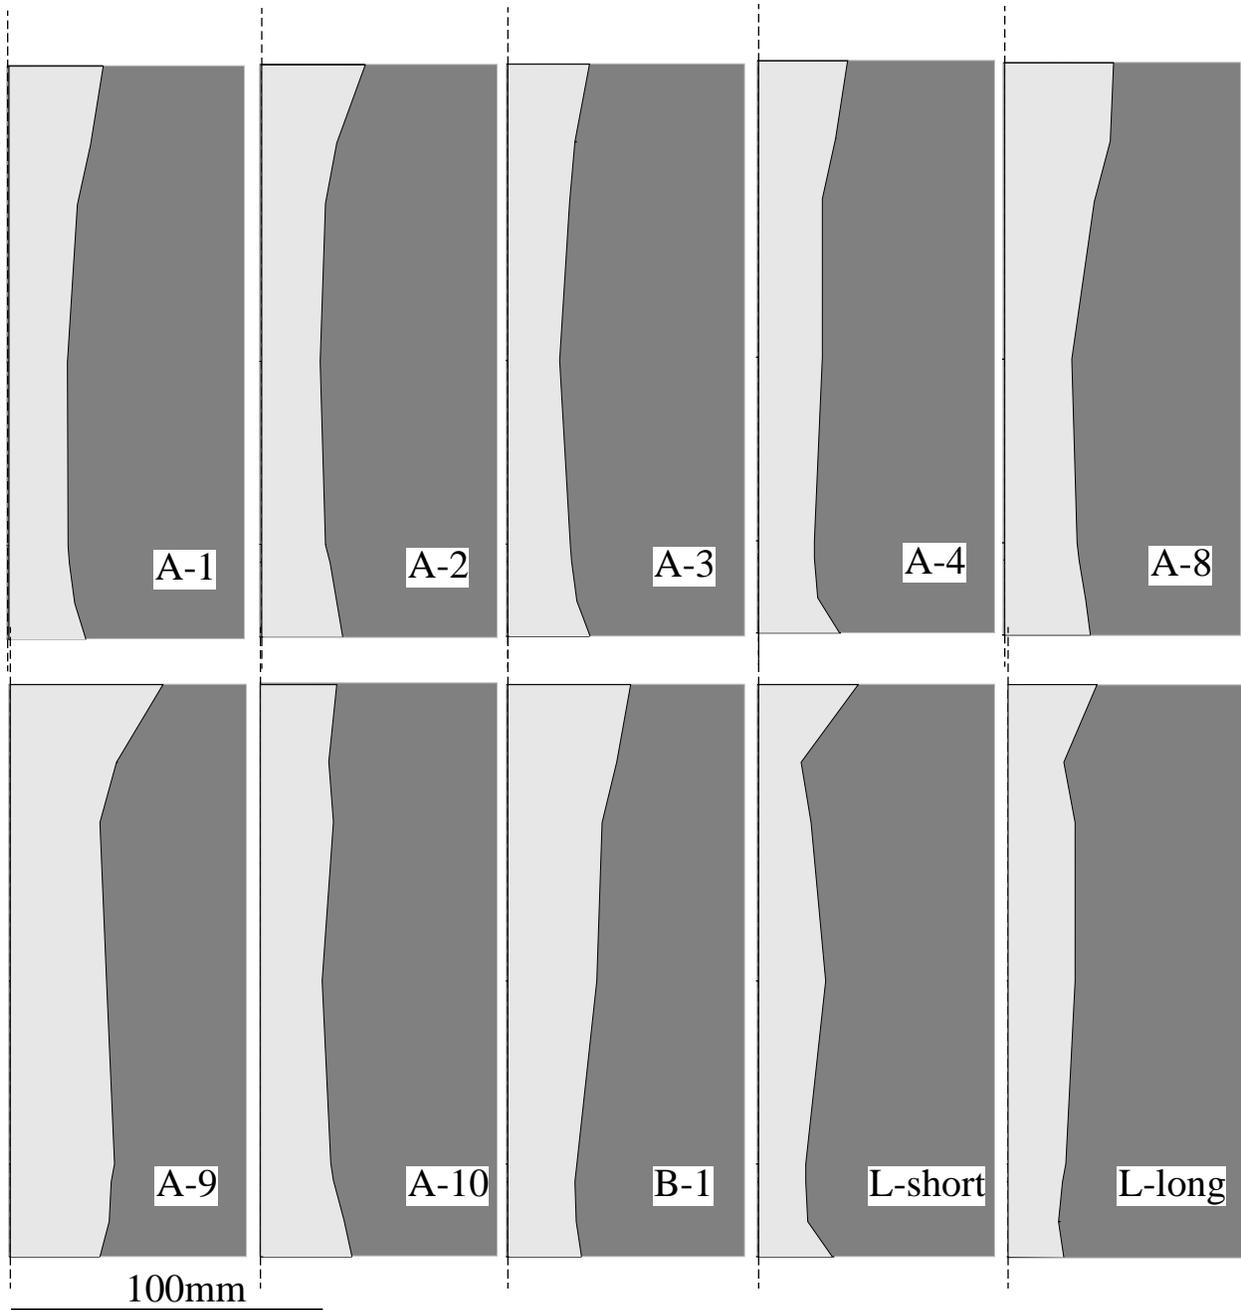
Scale drawings of half profiles of weld metal evident in 10 radiographs of the weld sections described in text. The dashed line is the weld centerline. The light area represents weld metal. The bottom of each image is the base of the rail. The top of the image is the running surface.
